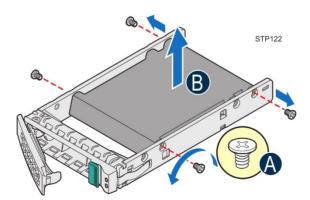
2.5" Storage Device Installation – Removing the Drive Blank
